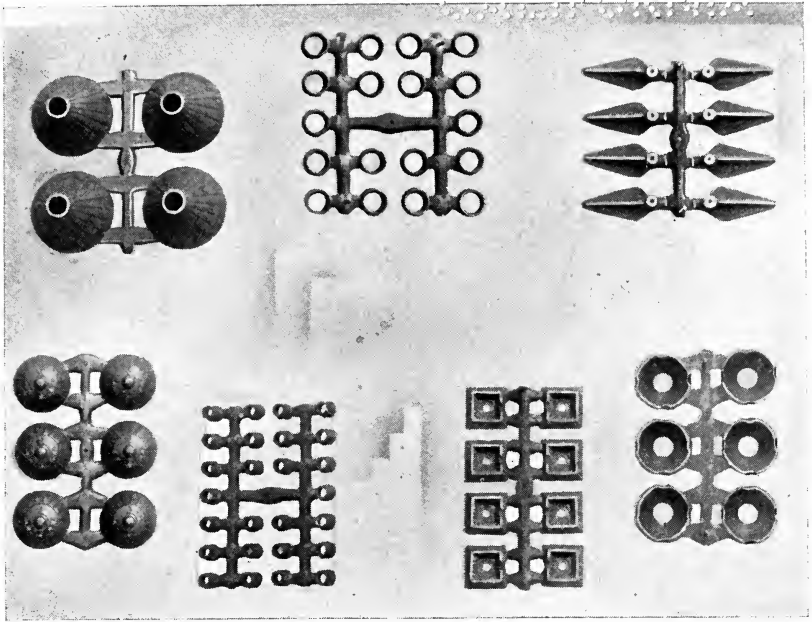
Gated metal patterns for chandelier trimmings and other small castings
